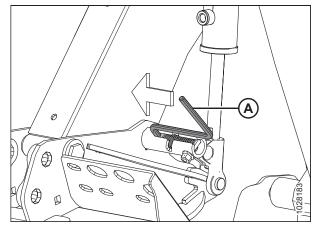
Engaged Reel Safety Prop - Center Arm
